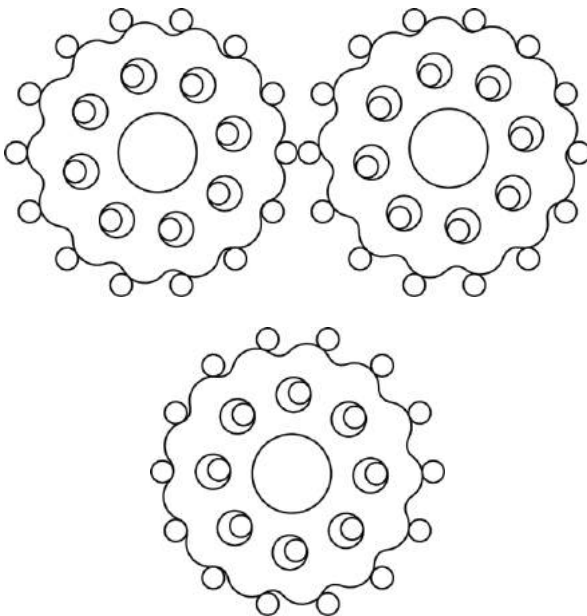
Resulting assembly drawing for Drive 2 at input shaft angles 0° , 45° and 198°
